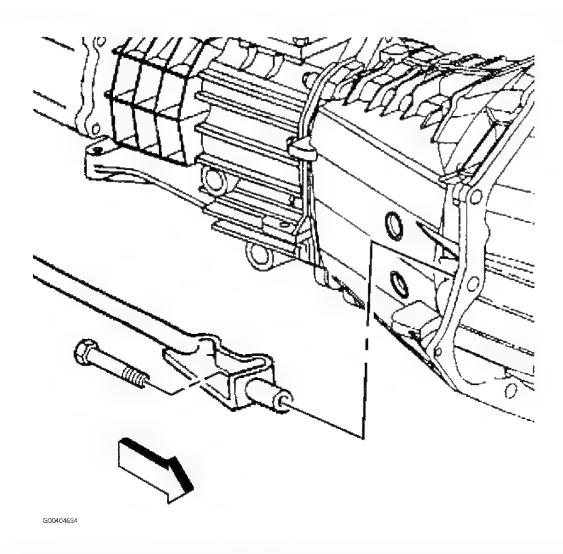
Removing/Installing Right Side Transfer Case-To-Transmission Support Brace Bolt (4WD)
